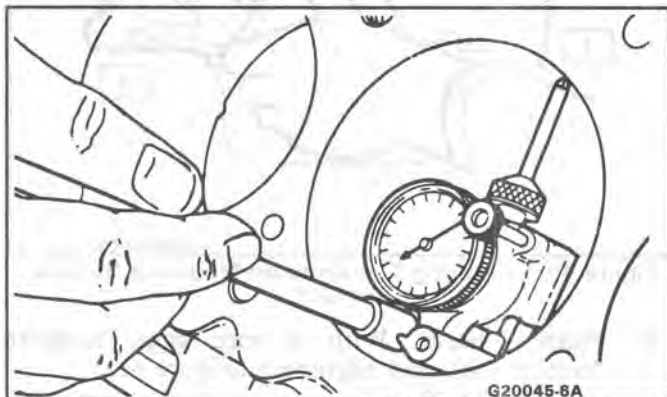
Measuring Cylinder Bore For Taper and Out of Round
